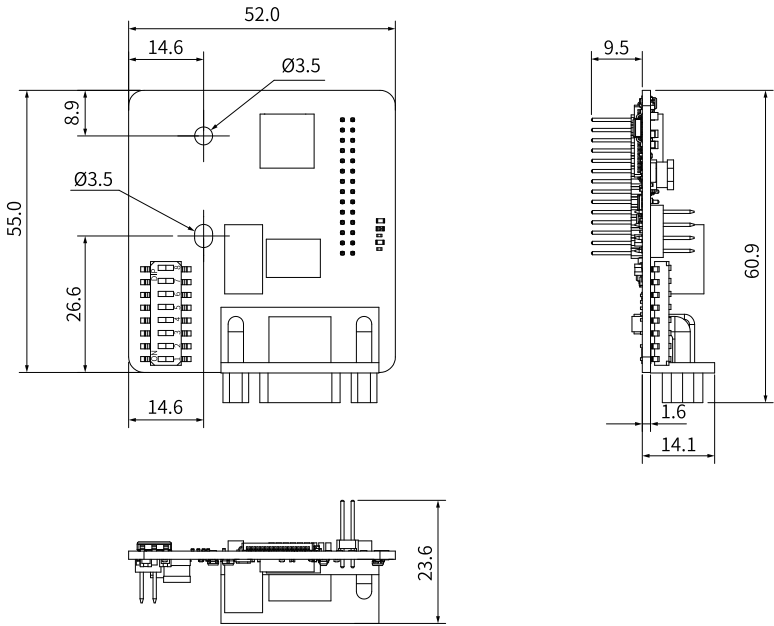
MD-SI-DP2 card dimensions (unit: mm)
